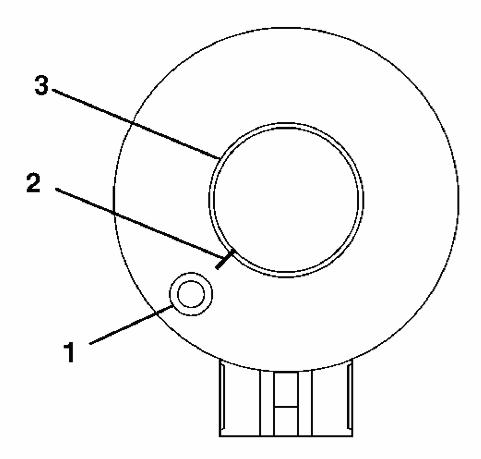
View Of Steering Wheel Position Sensor Rotor Flange Cuff, Centering Pin Hole & Alignment Mark Courtesy of GENERAL MOTORS CORP.
